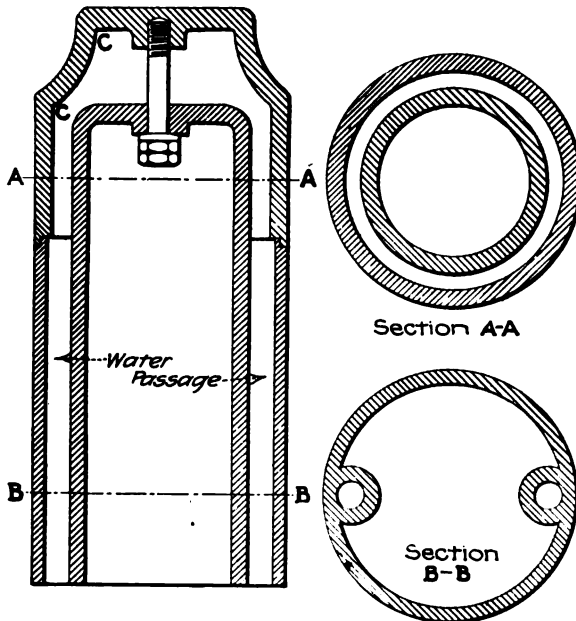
Standard Fuel Oil Diesel. Power piston.
